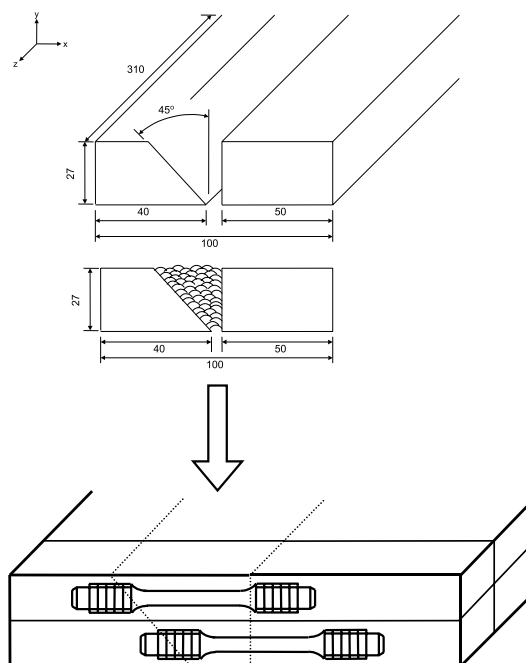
Schematic of HAZ tensile specimen preparation (dimensions in mm).
